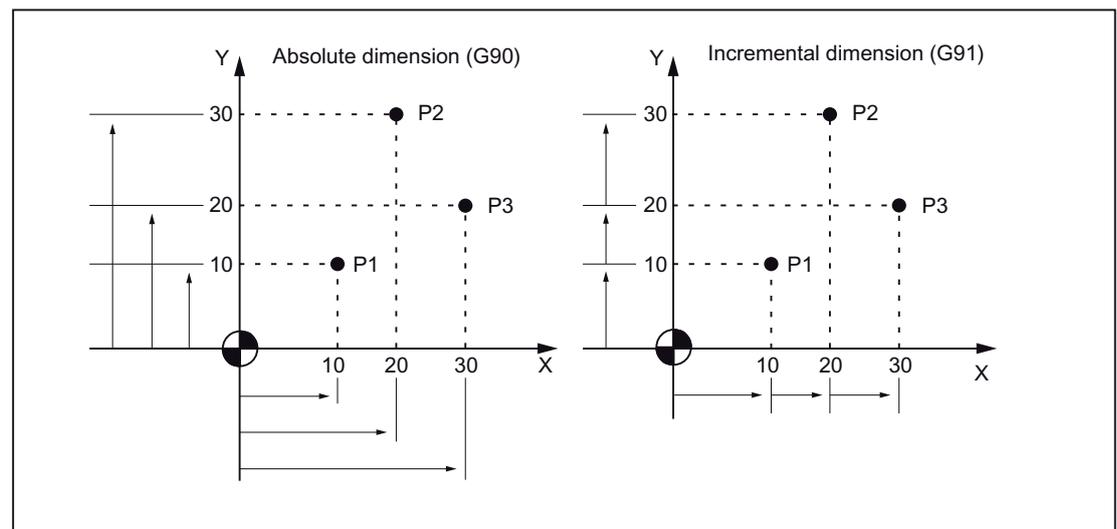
Absolute and incremental dimensioning (G90, G91)
